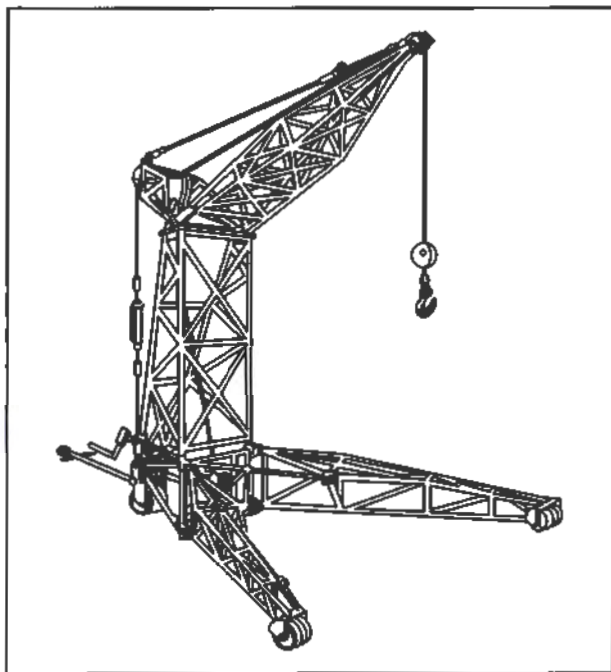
When using a hoist and frame assembly, make sure the hoist can reach the engine with adequate clearance and is rated for the weight of the engine being lifted.
